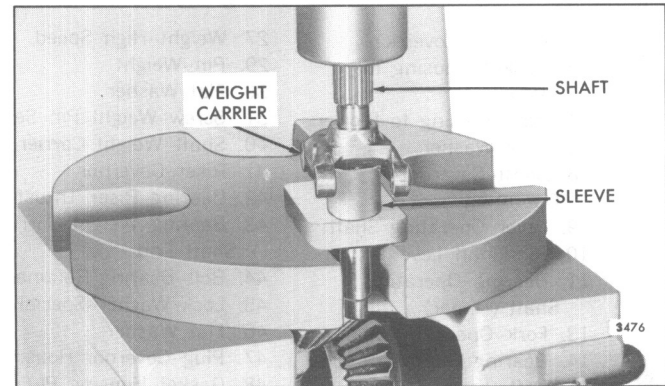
Installing Governor Weight Shaft in Weight Carrier
